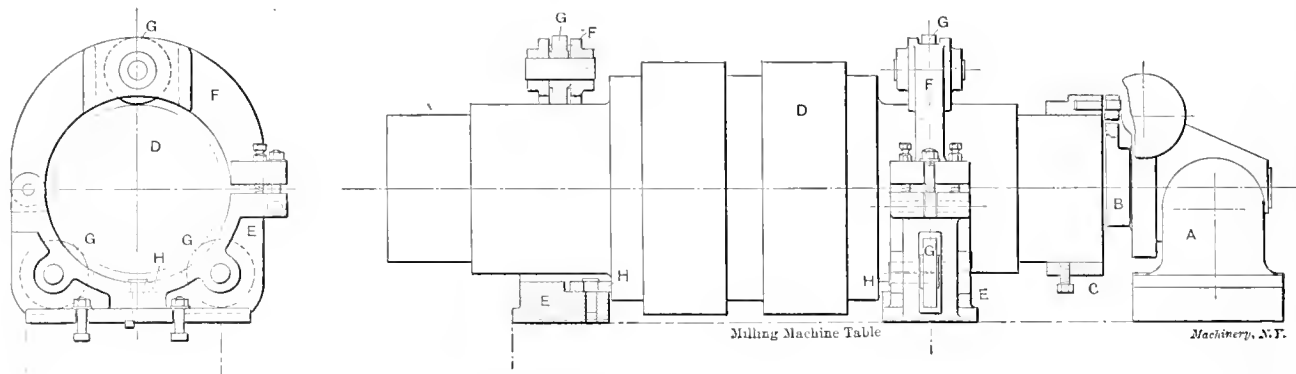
Arrangement of Supporting and Driving Devices for the Roll shown in Place on the Miller in Figs. 1 and 5.
